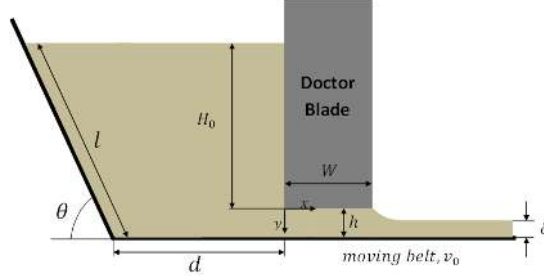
Schematic geometry of the tape casting machine in 2D.
